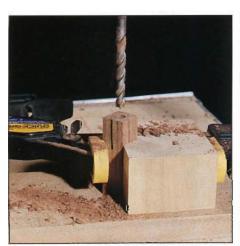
Photo B: Drill the hole through the center of both blanks using a drill press and a V-block. Note the alignment mark on one face.
